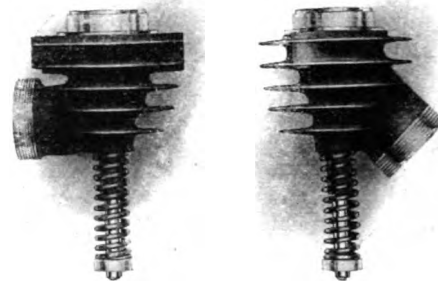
Inlet Valve and Seating Fig. 5.—Exhaust Valve and Seating removed from Cylinder.
